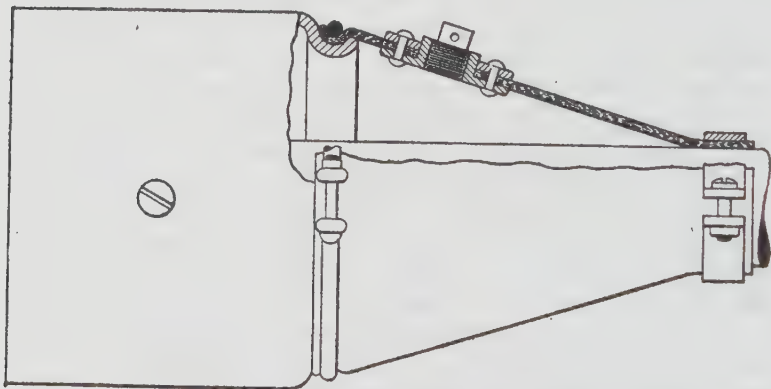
FIG. III.—LEATHER BOOT FOR UNIVERSAL JOINT.
